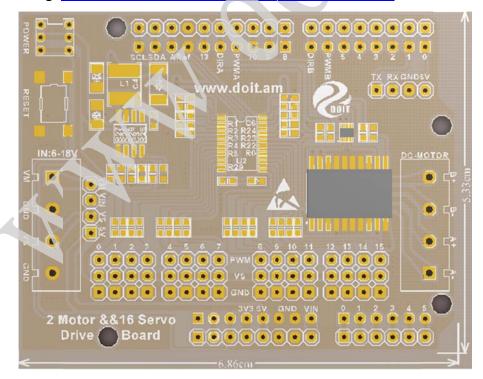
PCB view for 2Motor & 16 Servo Drive Board
